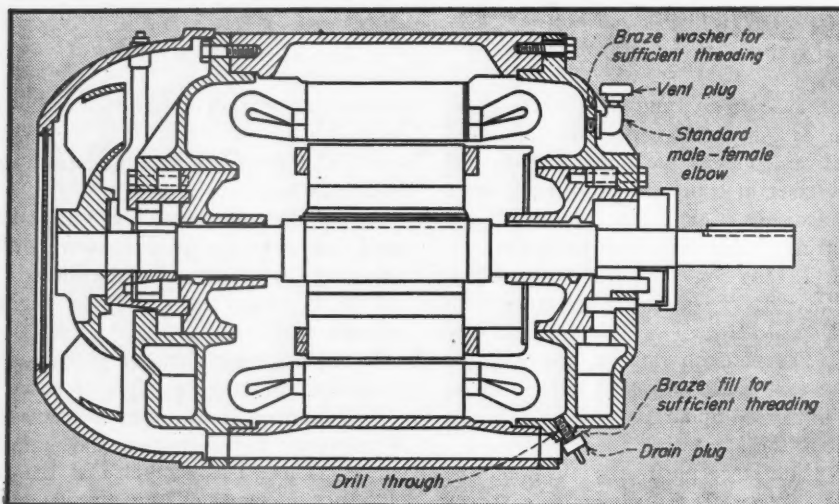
Installation of explosion-proof vent and drain plugs in the end bell of an explosion-proof motor.
